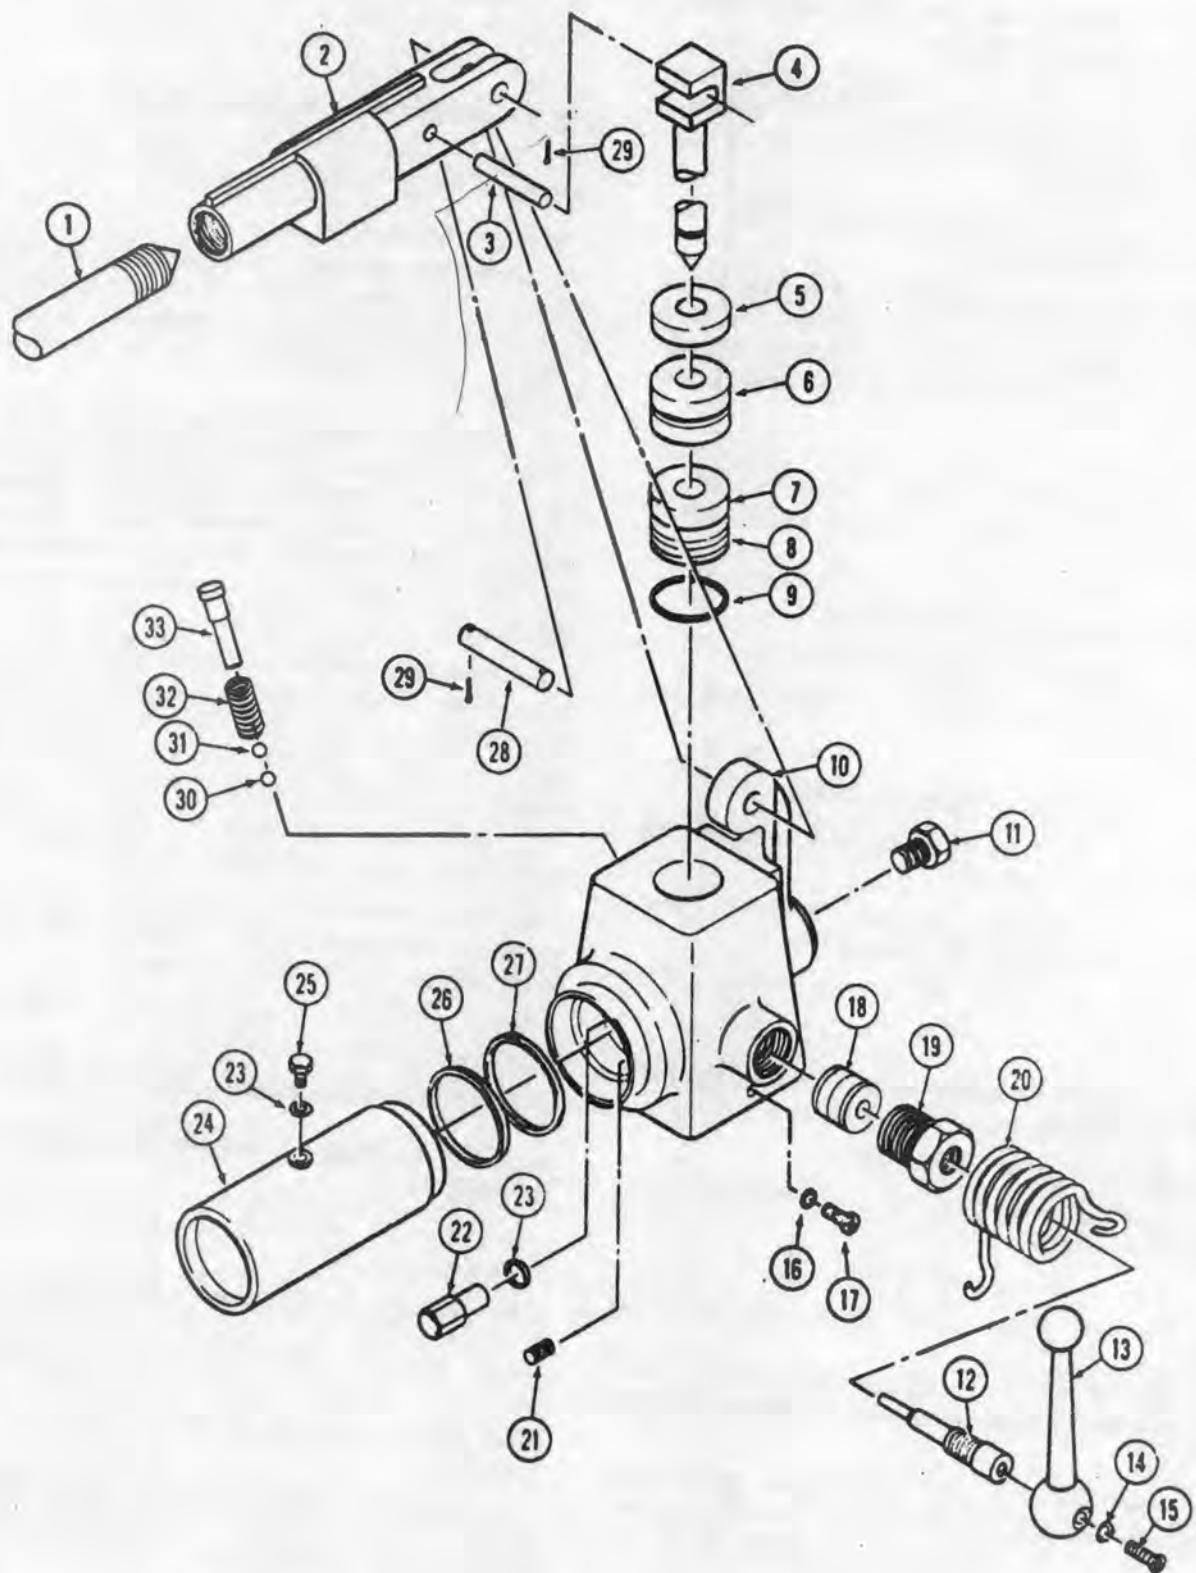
Ground Handling Gear Pump P/N HP-9902-41-10 (Sheet 1 of 2)
